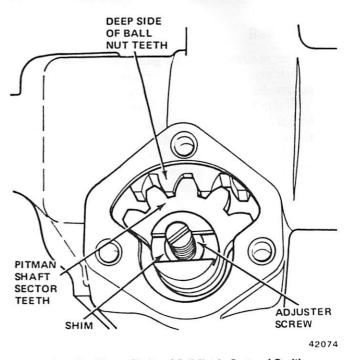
K-15 Pitman Shaft and Ball Nut In Centered Position
